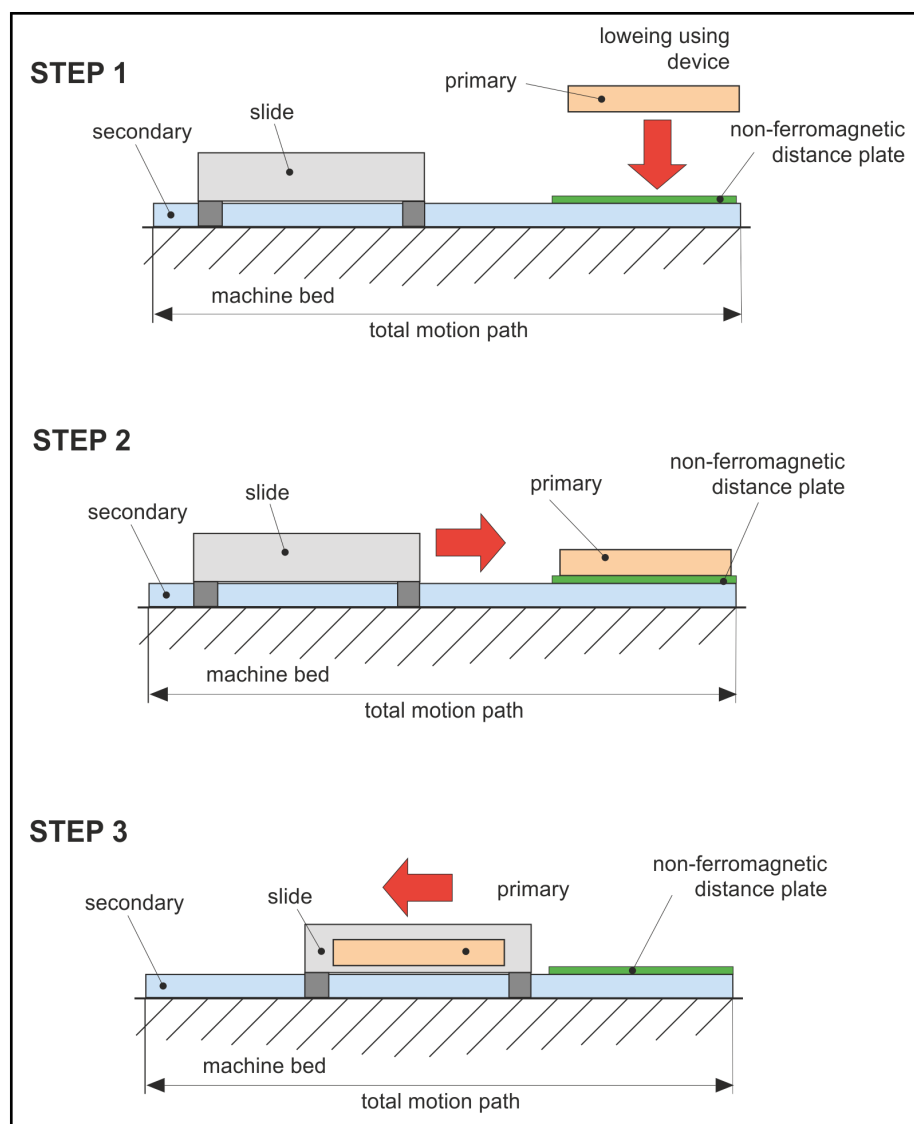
Installation of linear motor components at a complete secondary part via the total path.
